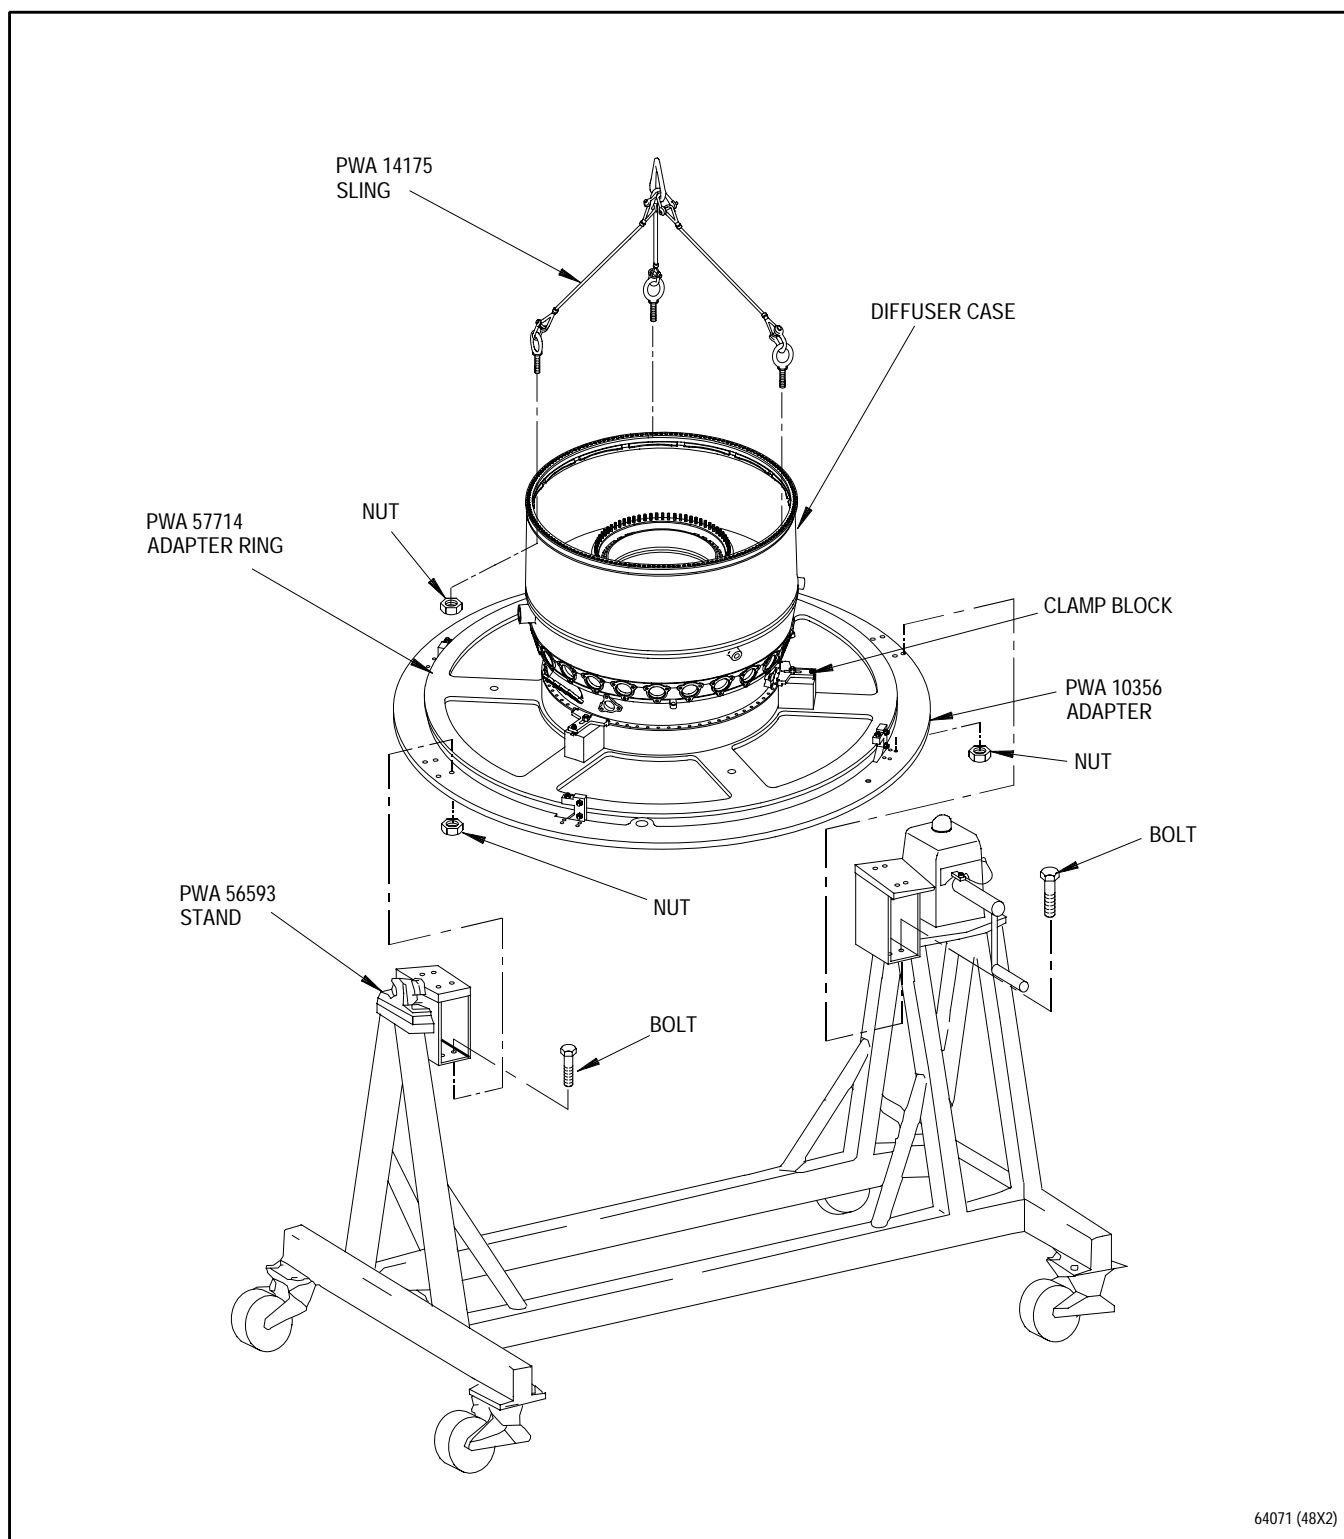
Diffuser Case Installation Into PWA 56593 Stand
